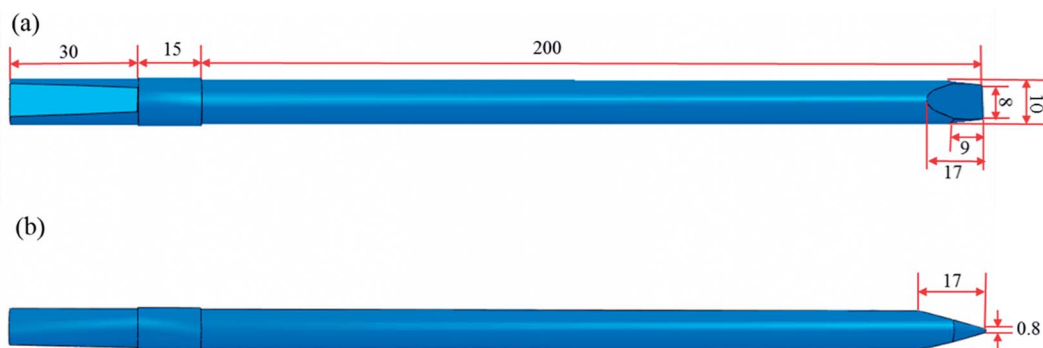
Geometric dimensions of the penetrator. (a) Front view; (b) side view.
